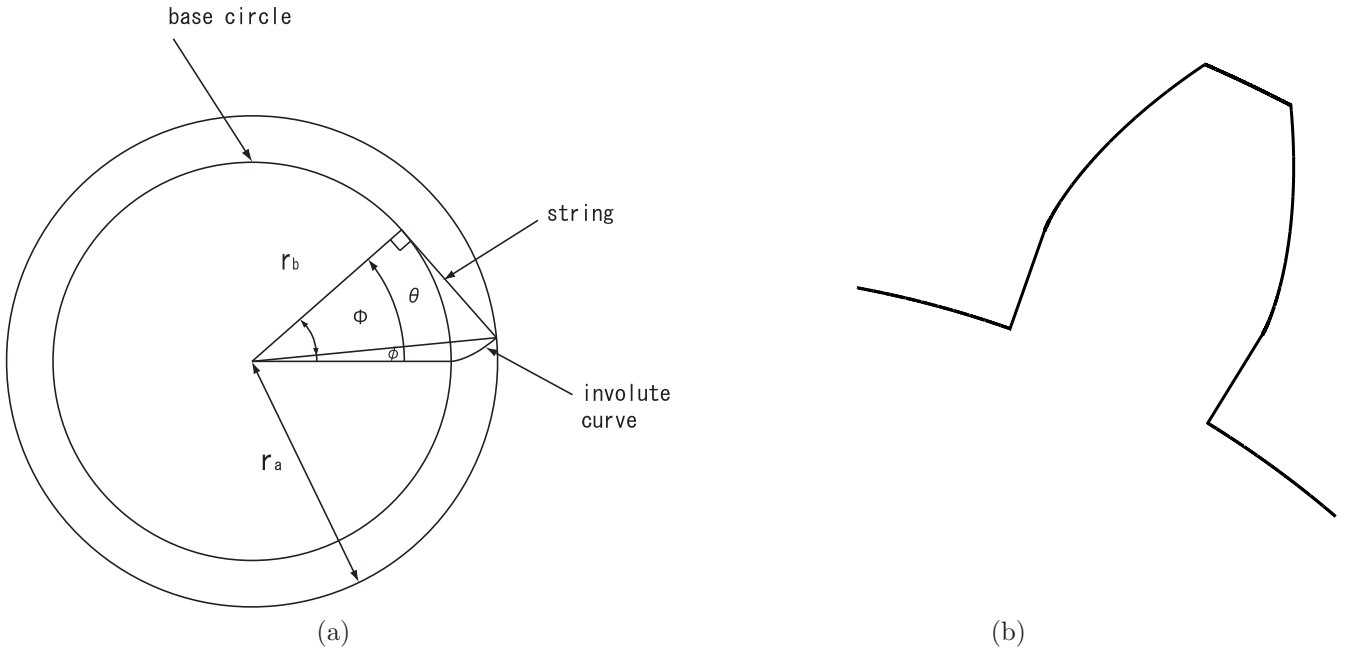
(a) Definition of a circle involute. (b) A gear tooth profile.
